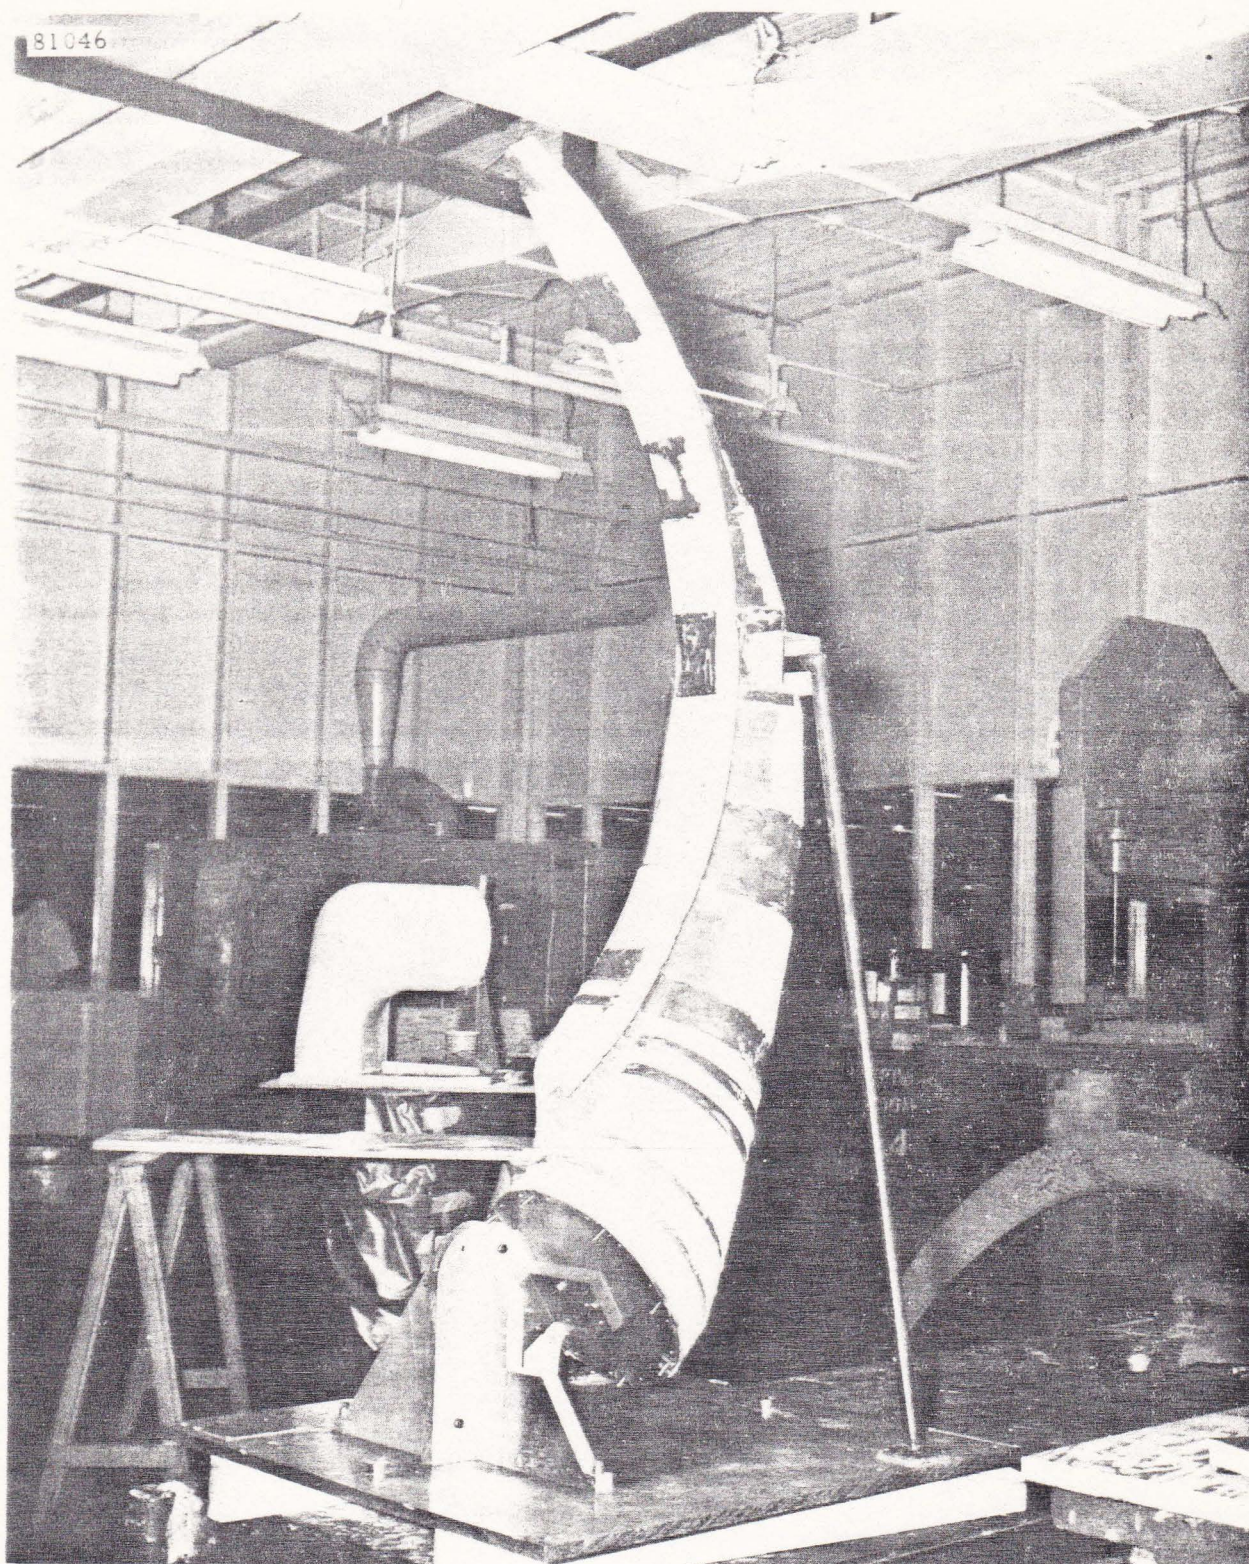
MASTER MODEL FOR ENGINE JET PIPES
